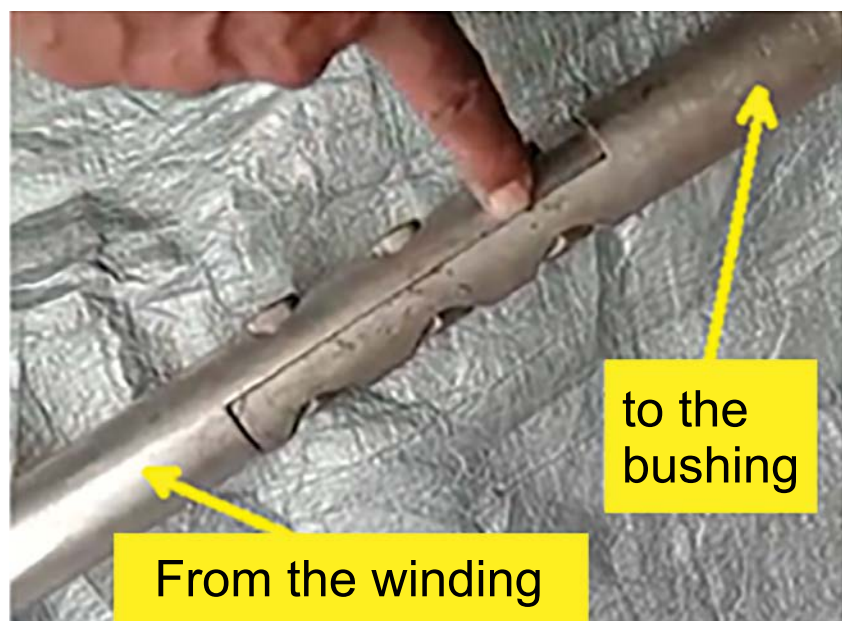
C. The joint between the draw-rod of the bushing and the winding lead
